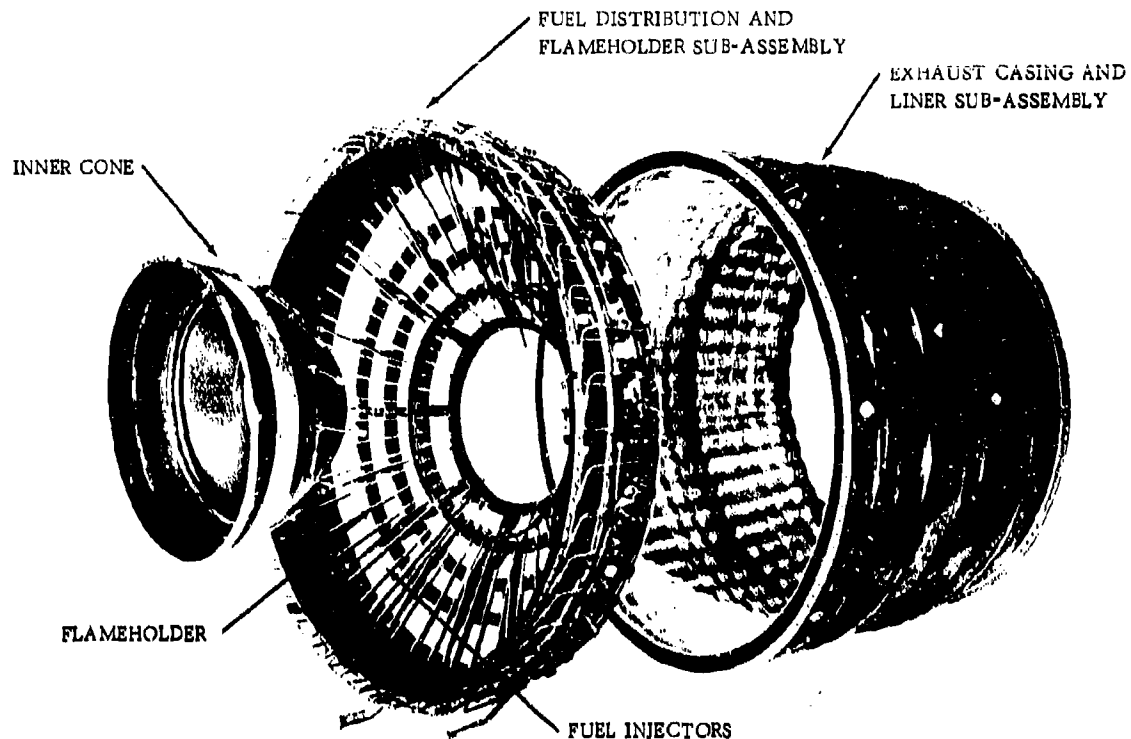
GE4 AUGMENTOR ASSEMBLY
